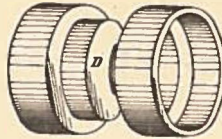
Fig. G. Is a view of the COVER to the SUPPLEMENTARY SLIDE VALVE, F.
